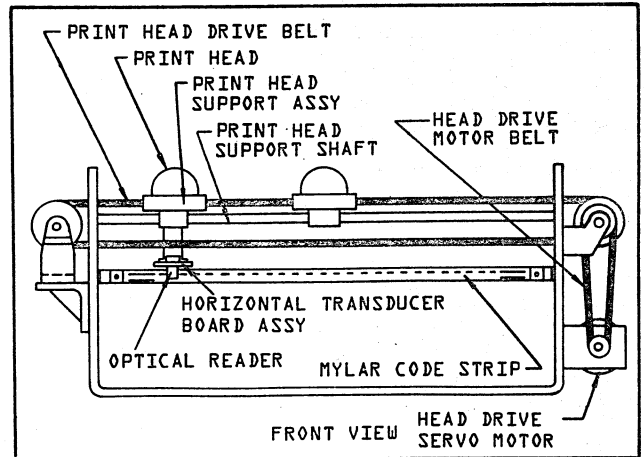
PRINT HEAD DRIVE AND MONITORING
